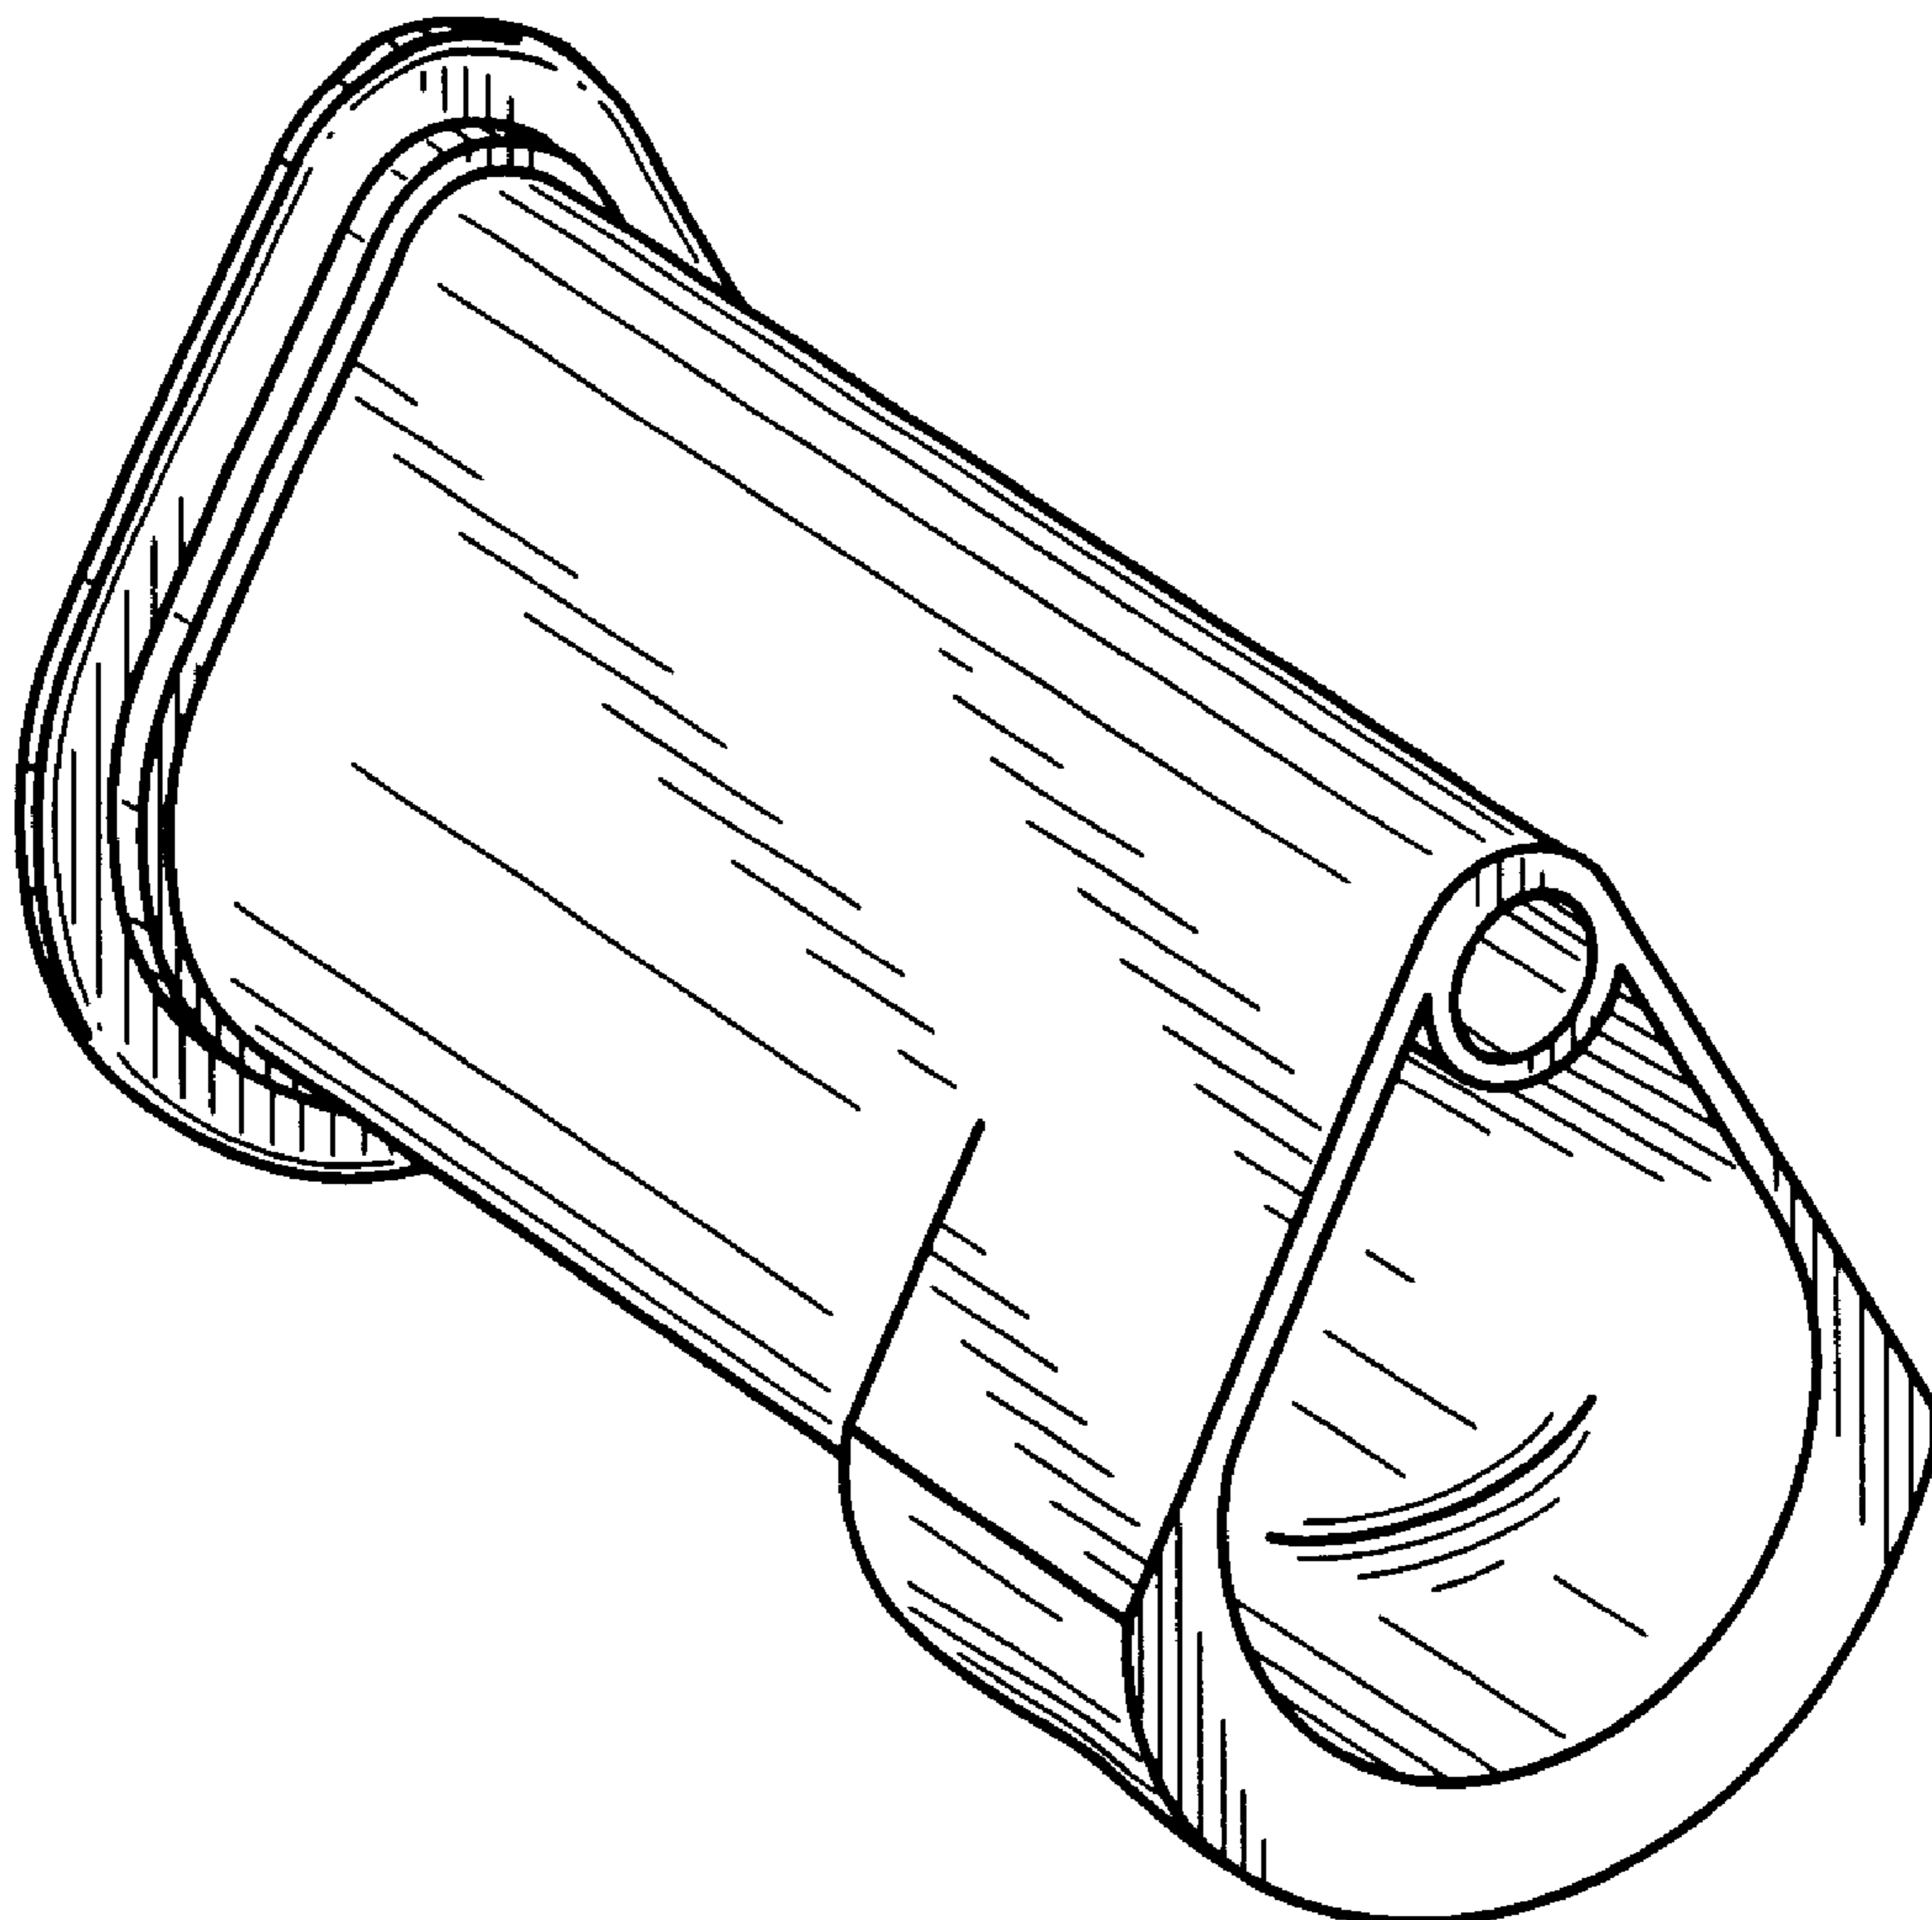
is a perspective view of the fishing bobber showing my new design;
